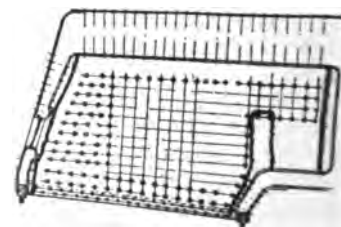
FIREBOX AND COMBUSTION CHAMBER WELDED.
